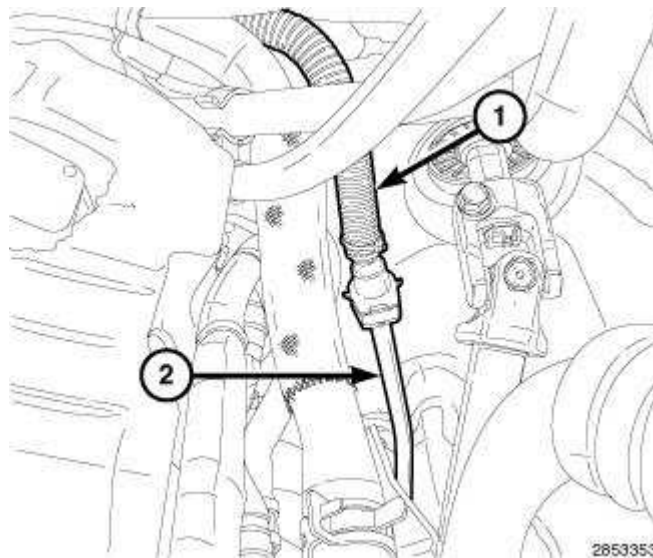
Fuel Supply Hose At Underbody Fuel Supply Tube
